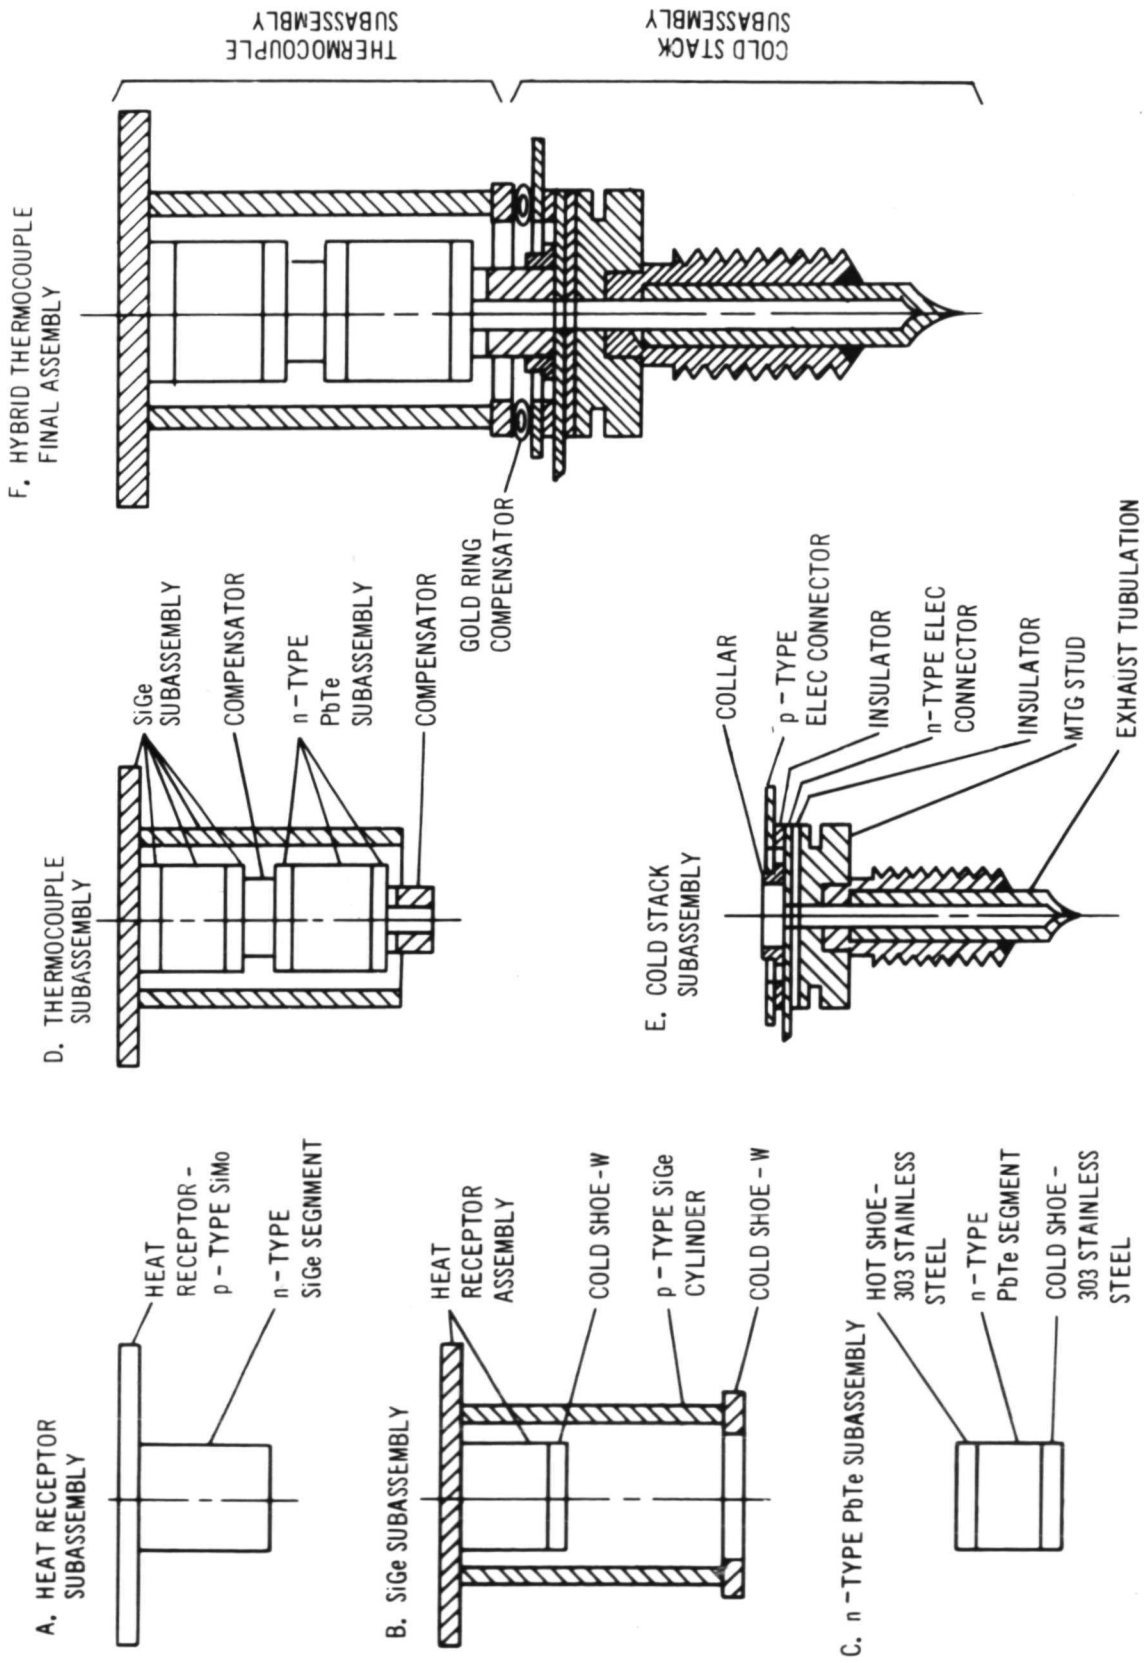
Hybrid Thermocouple Assembly Sequence - B
